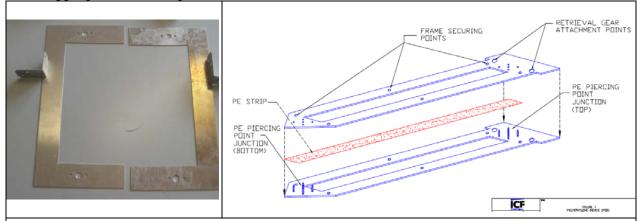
(left panel) Aluminum sheet cut into two "C-shaped" pieces allowing one to mount and hold ~25 cm strips of PE an open window when the two pieces are overlapped and bolted together. (right panel) Drawing of two aluminum sheet pieces cut so as to sandwich a strip of PE and expose about 50 cm of length.
